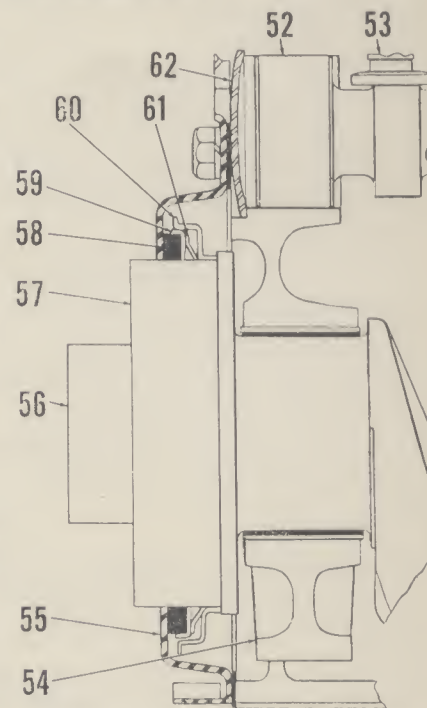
A—Cross-sectional view showing the crankshaft rear oil seal which is made of specially treated cork.
